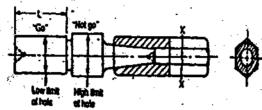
A progressive form of plug gauge in which L = Length of component + 3.2 mm
